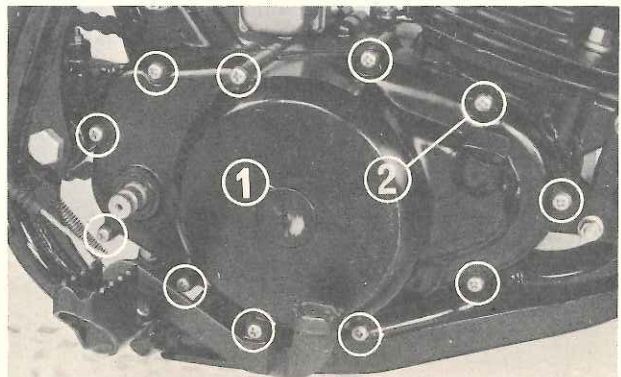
(1) Right crankcase cover (2) 6 mm Screws
